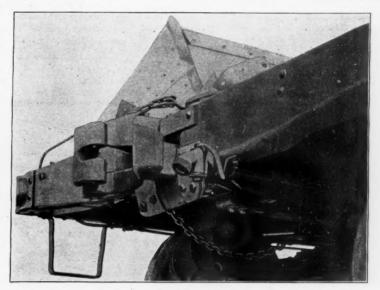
View Showing the Condition of the Westinghouse Friction Buffer After Severe Collision, Bottom Plate Removed.
